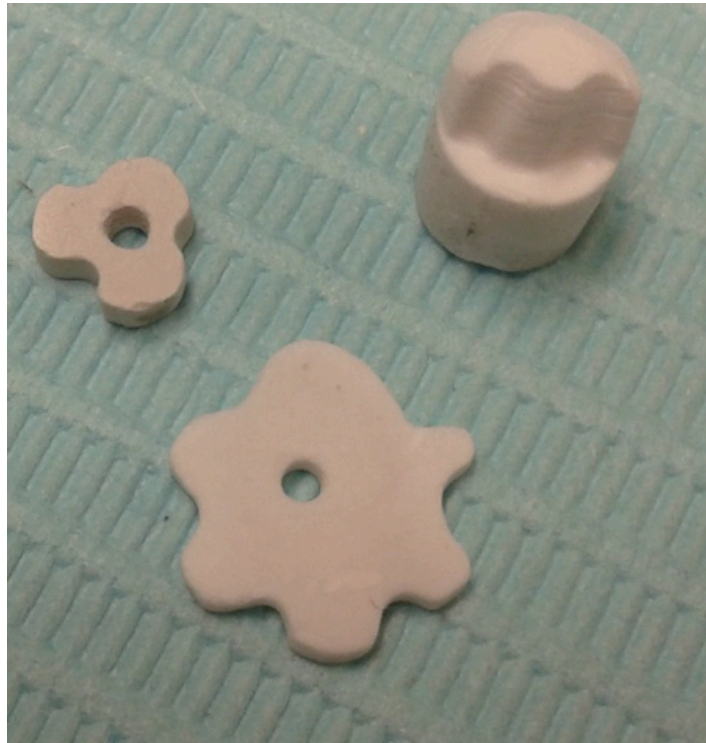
Representative image of machined GC-B specimens. Holes and grooves were cut on 1 mm thick disks and bevels with shoulder finish line were prepared on GC ingot. The preparation was going smooth without chipping or developing cracks.
